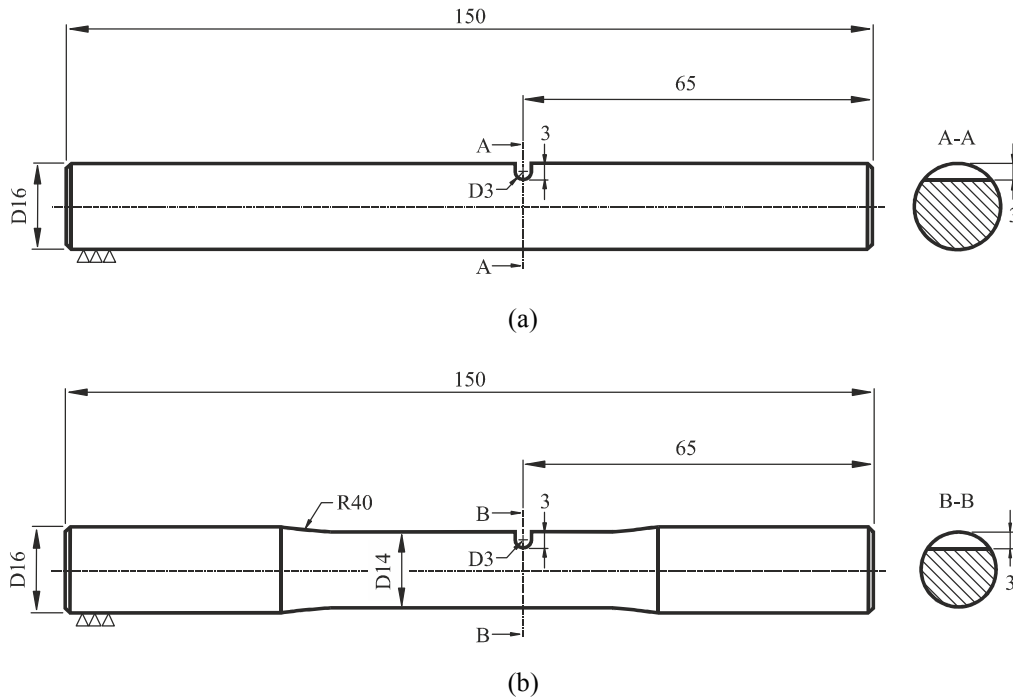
Specimen geometries used in the multiaxial fatigue tests: (a) single bending and bending-torsion; (b) single torsion (dimensions in millimetres)
